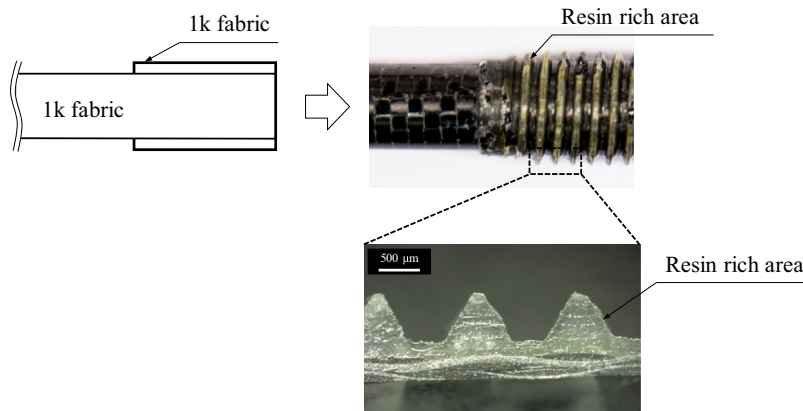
Thread part that was fabricated with carbon fabric/epoxy prepregs.
